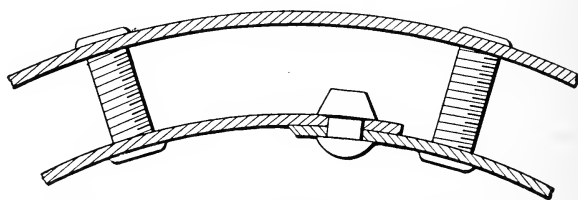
PROPER LOCATION OF STAYBOLTS ADJACENT TO LONGITUDINAL JOINT IN FURNACE SHEET
